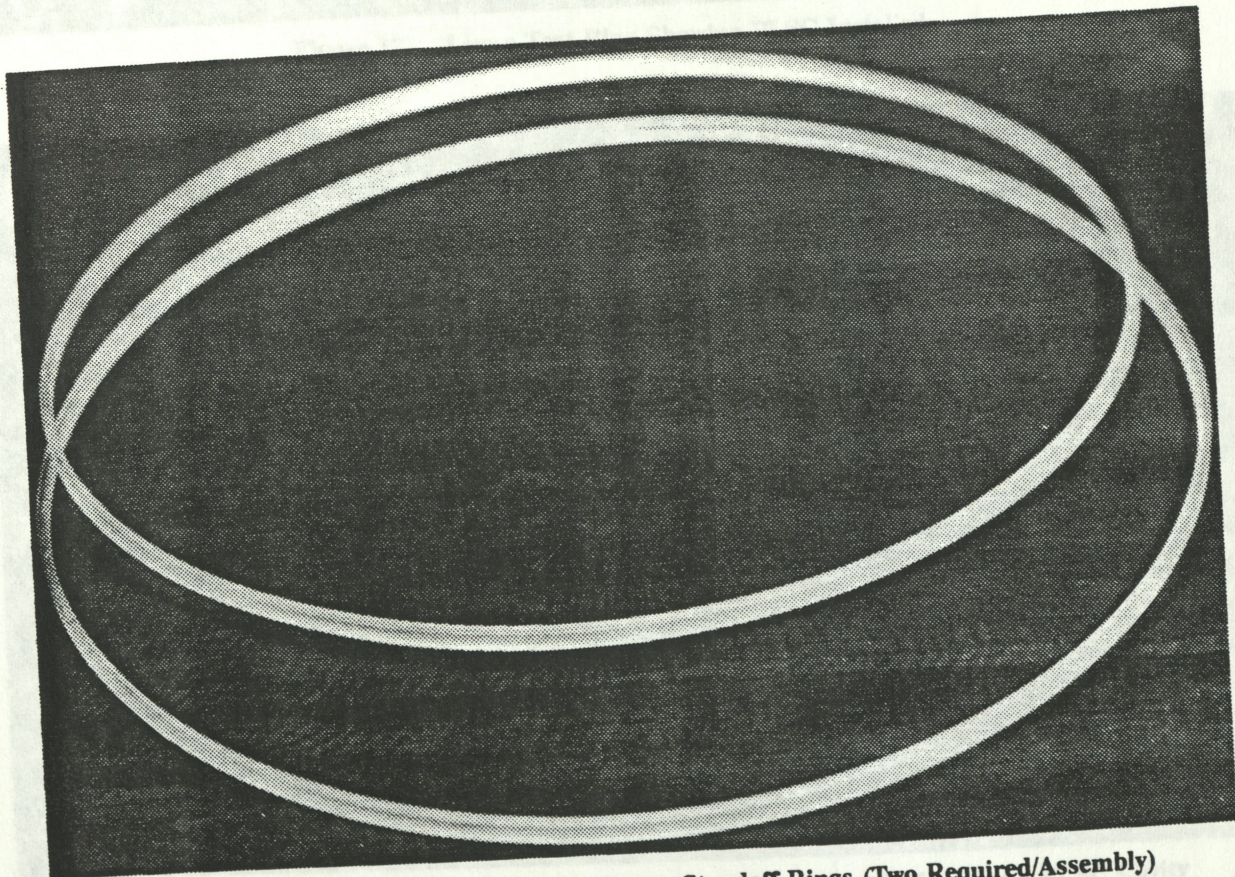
Machined 0.100-inch-thick Lexan Standoff Rings (Two Required/Assembly)
